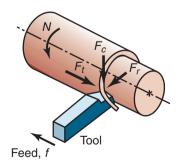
Forces acting on a cutting tool in turning. F_c is the cutting force, F_t is the thrust or feed force (in the direction of feed), and F_r is the radial force that tends to deflect the tool away from the workpiece being machined.
